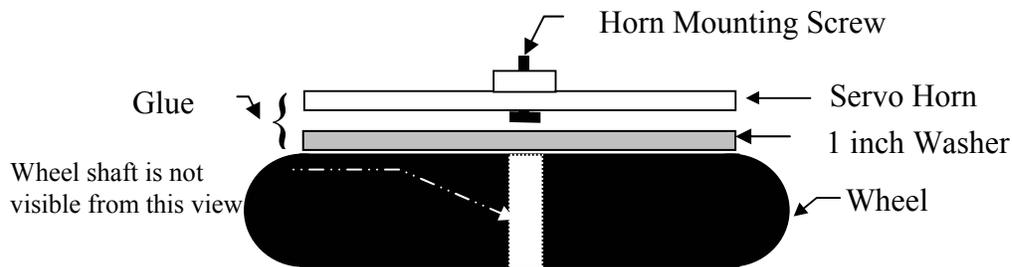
Center the washer and glue to wheel. Insert horn mounting screw into horn. Center and glue top of horn to washer. Do not allow the horn screw to fall out or to become glued. Screw horn onto servo output shaft after glue dries.
